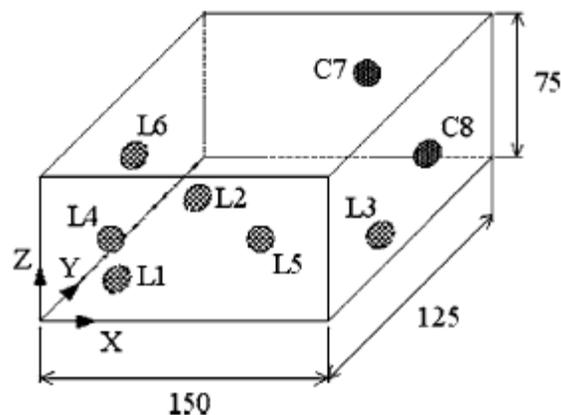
Scheme of 3-2-1 fixture setup [1].
